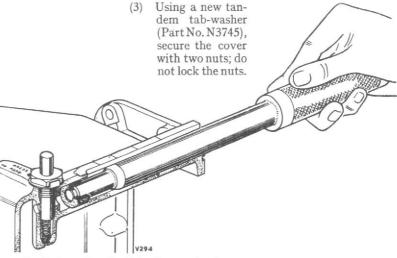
Inserting the sight glass seating into the sump using tool T74768
